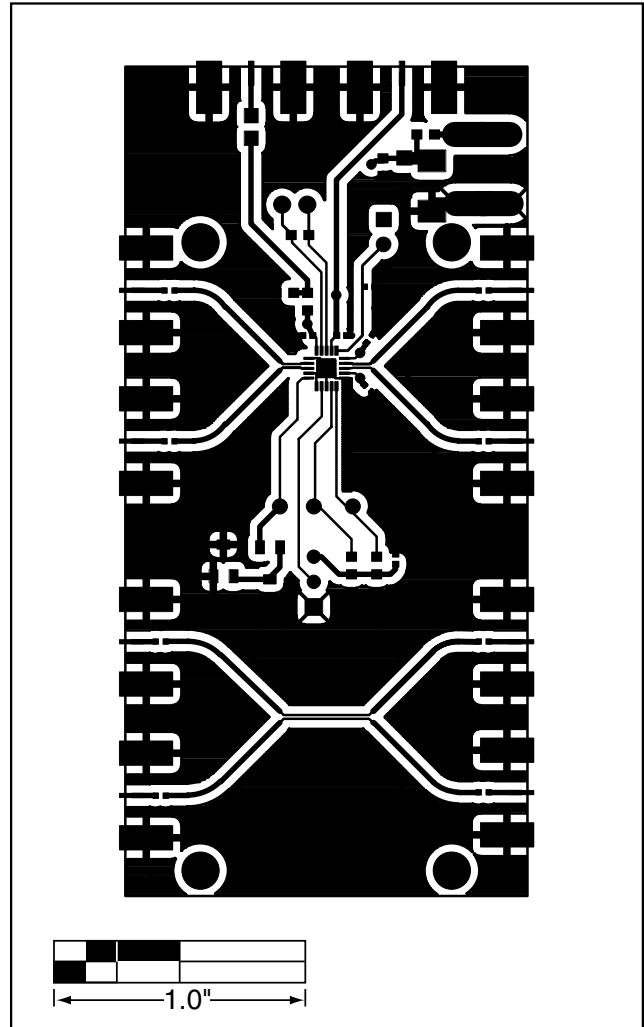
MAX3971 EV Kit PC Board Layout—Component Side
